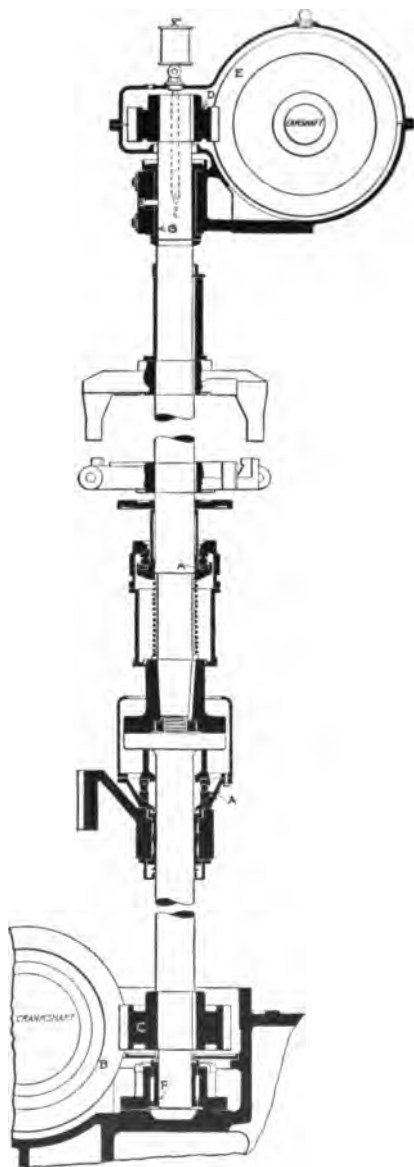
Governor shaft drive, McIntosh & Seymour Diesel.
